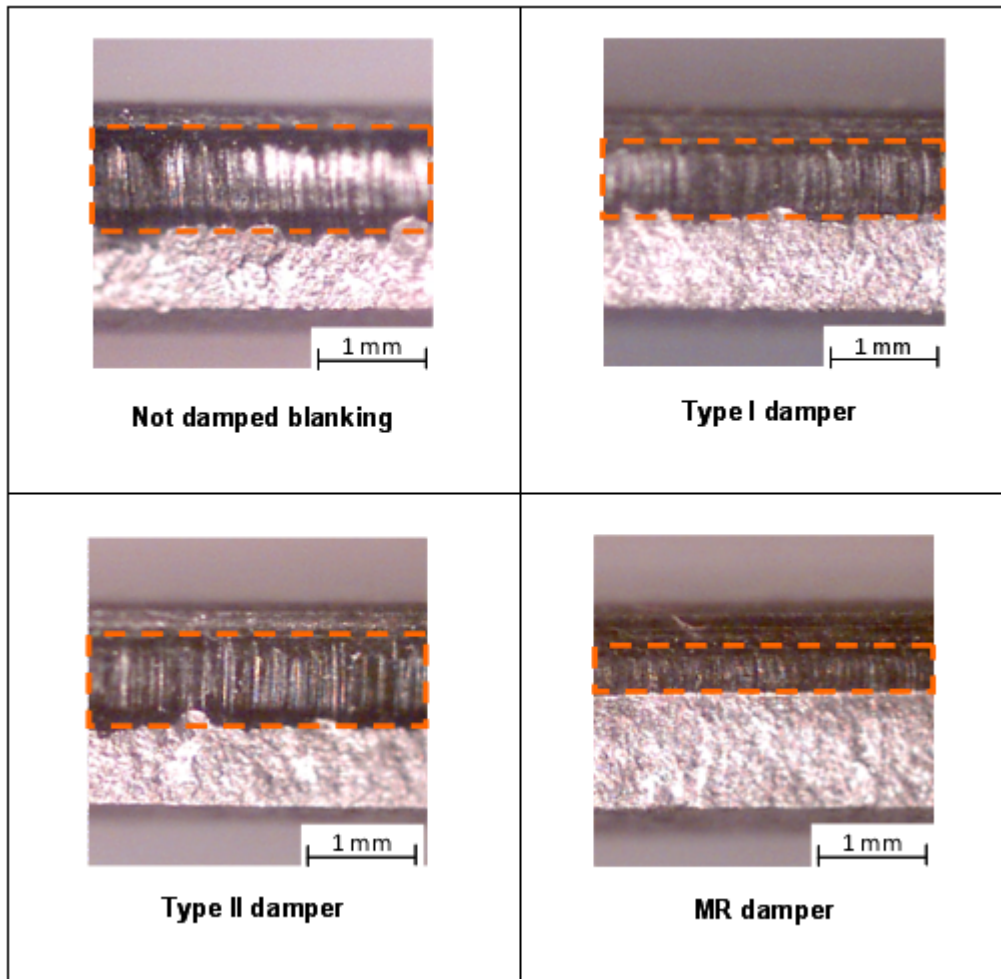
Fractured surfaces of 2 mm sheet in the cases studied.
